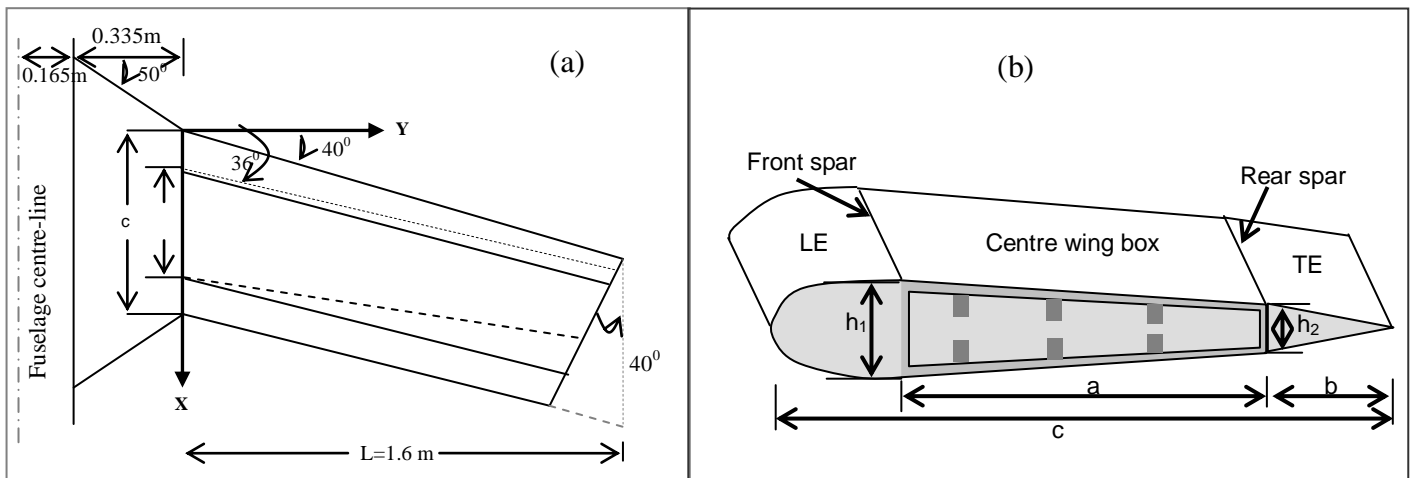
(a) Wing box configuration (— initial wing box; - - - - improved wing box); (b) Cross-sectional details of the wing box.
